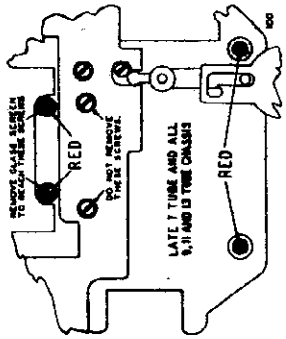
Location of 4 Red Mounting Bolts in Late Models
